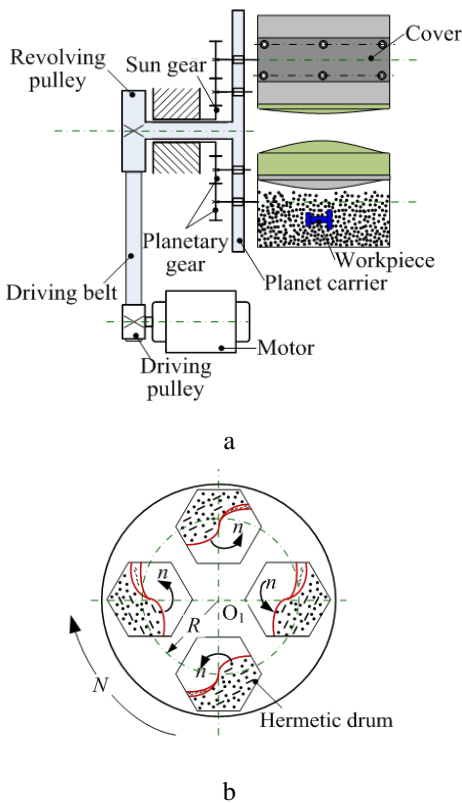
Schematic of the developed horizontal centrifugal barrel finishing equipment: a - front view, b - left view
